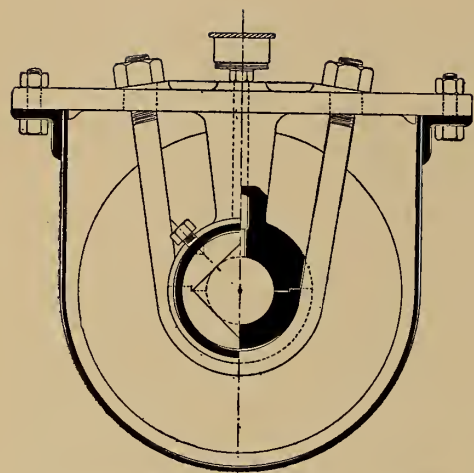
CROSS SECTION OF WORM CONVEYOR BEARING
